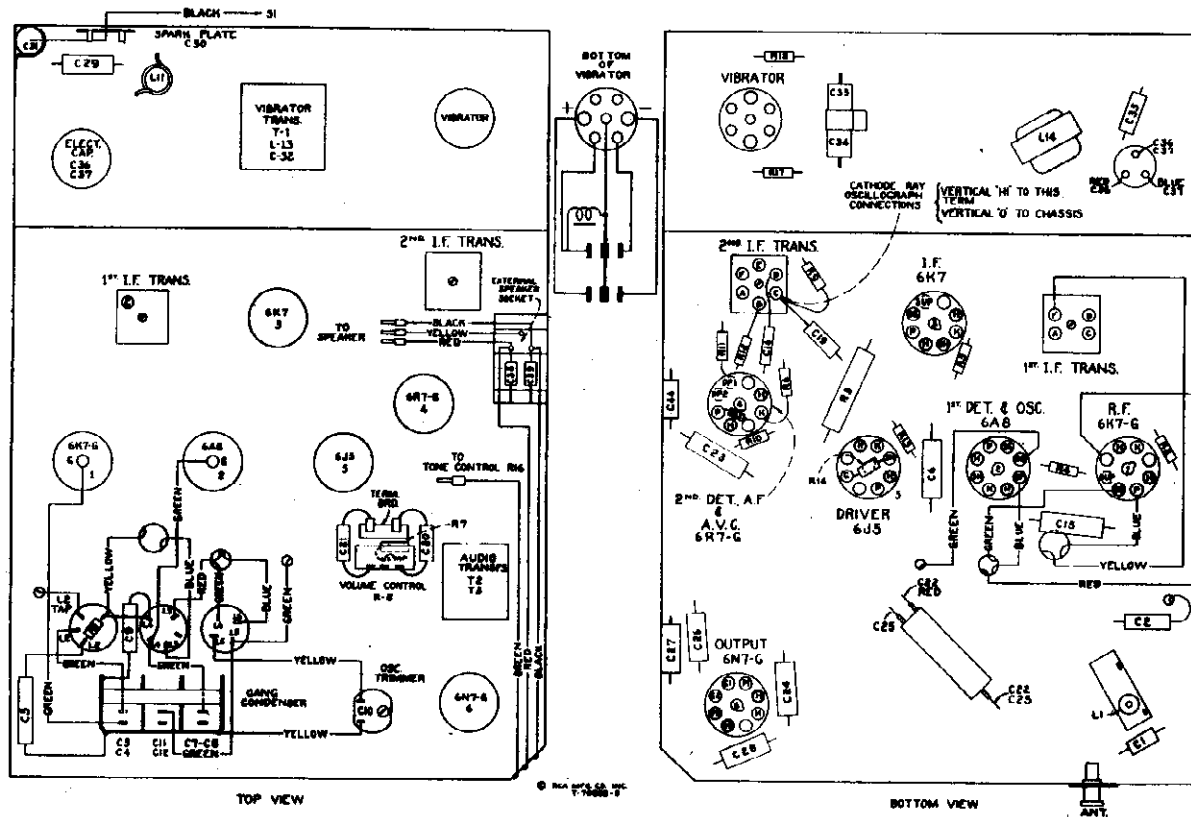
Component Parts Location and R-F Wiring Diagram (Model 8M3)
